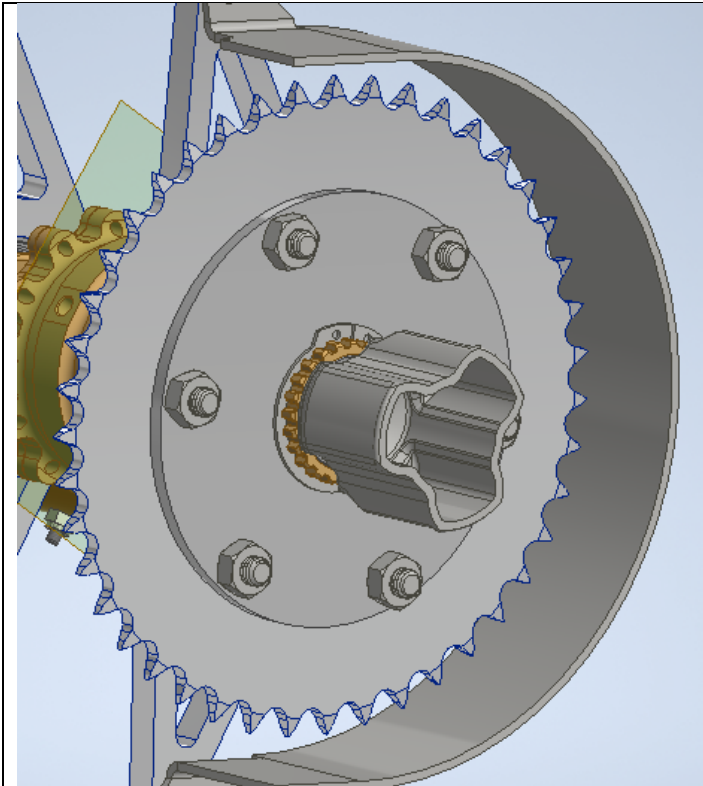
ARG23 Rear Sprocket Setup Driver's Left
